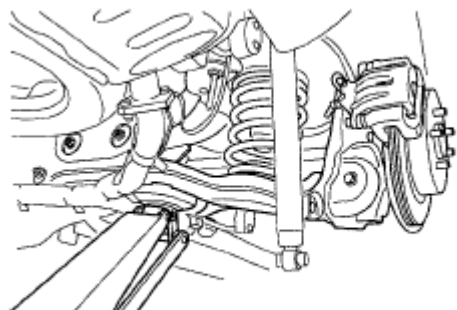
Supporting Rear Lower Arm Inner Side
